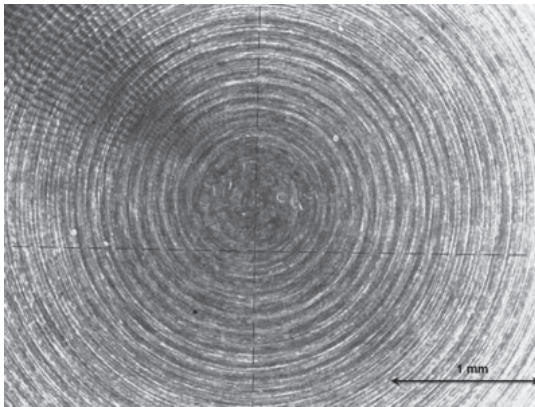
Part after toolpath 2 (enlarged 30-times)
